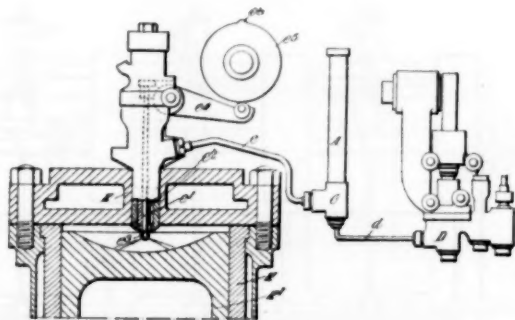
McKECHNIE'S EXPERIMENTAL ENGINE
